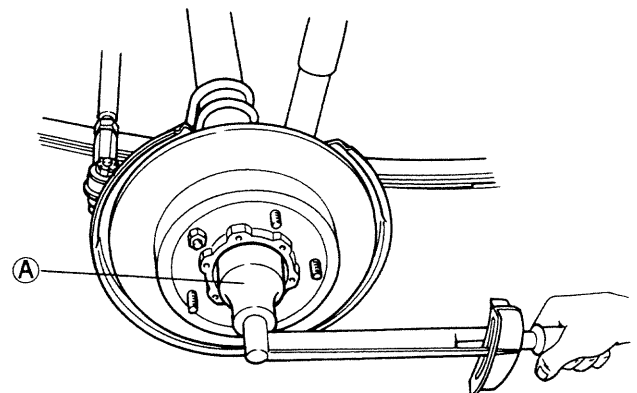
① Special tool (Front Wheel Bearing nut socket wrench 09941-58010)
